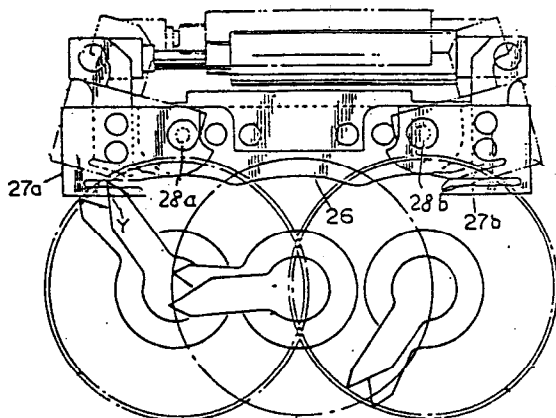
Multi-pede traverse apparatus with the equipment to reduce the saddle of the yarn package
